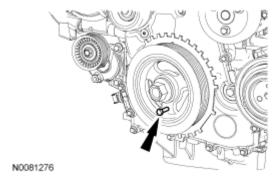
Identifying 6 mm x 18 mm Bolt Courtesy of FORD MOTOR CO.
